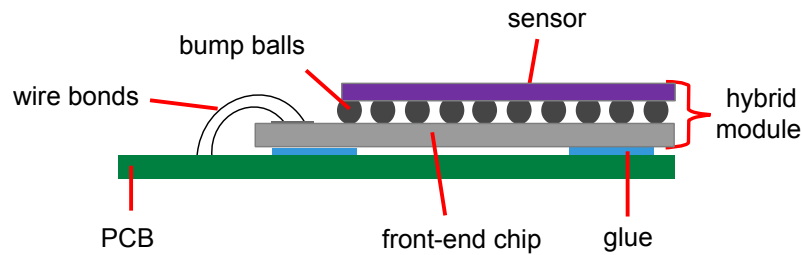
Cross sectional schematic view of a module consisting of a single sensor and a readout chip bump bonded together, glued and wire bonded into a PCB.
